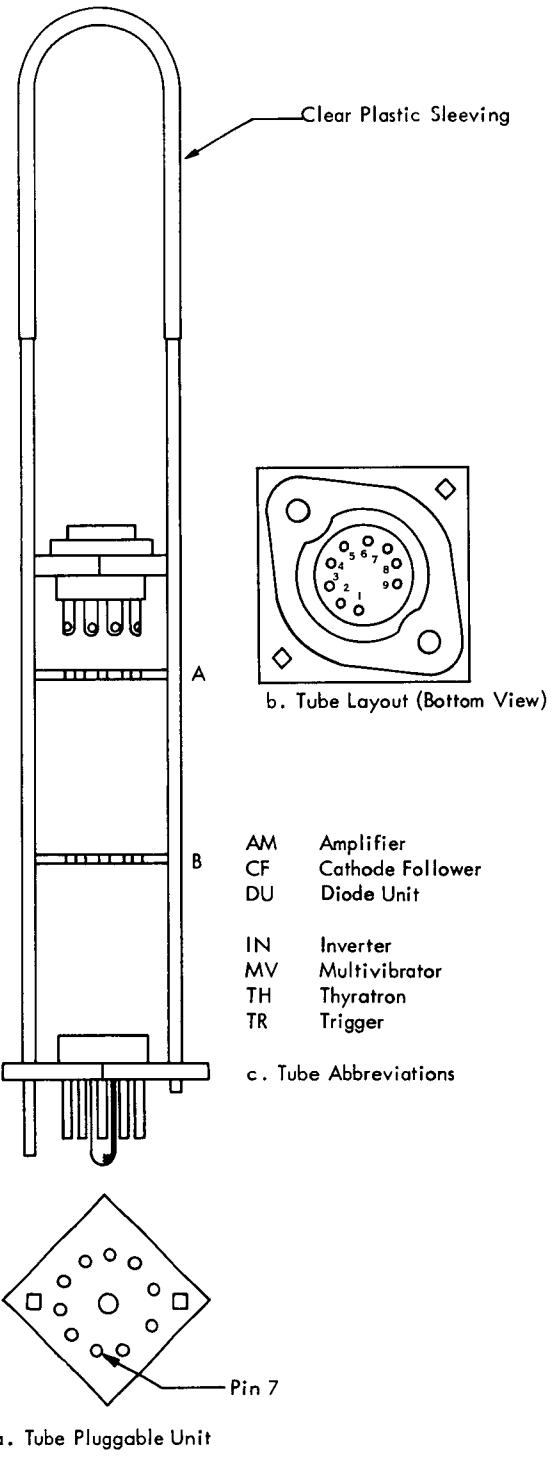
720 PRINTER PLUGGABLE UNIT
